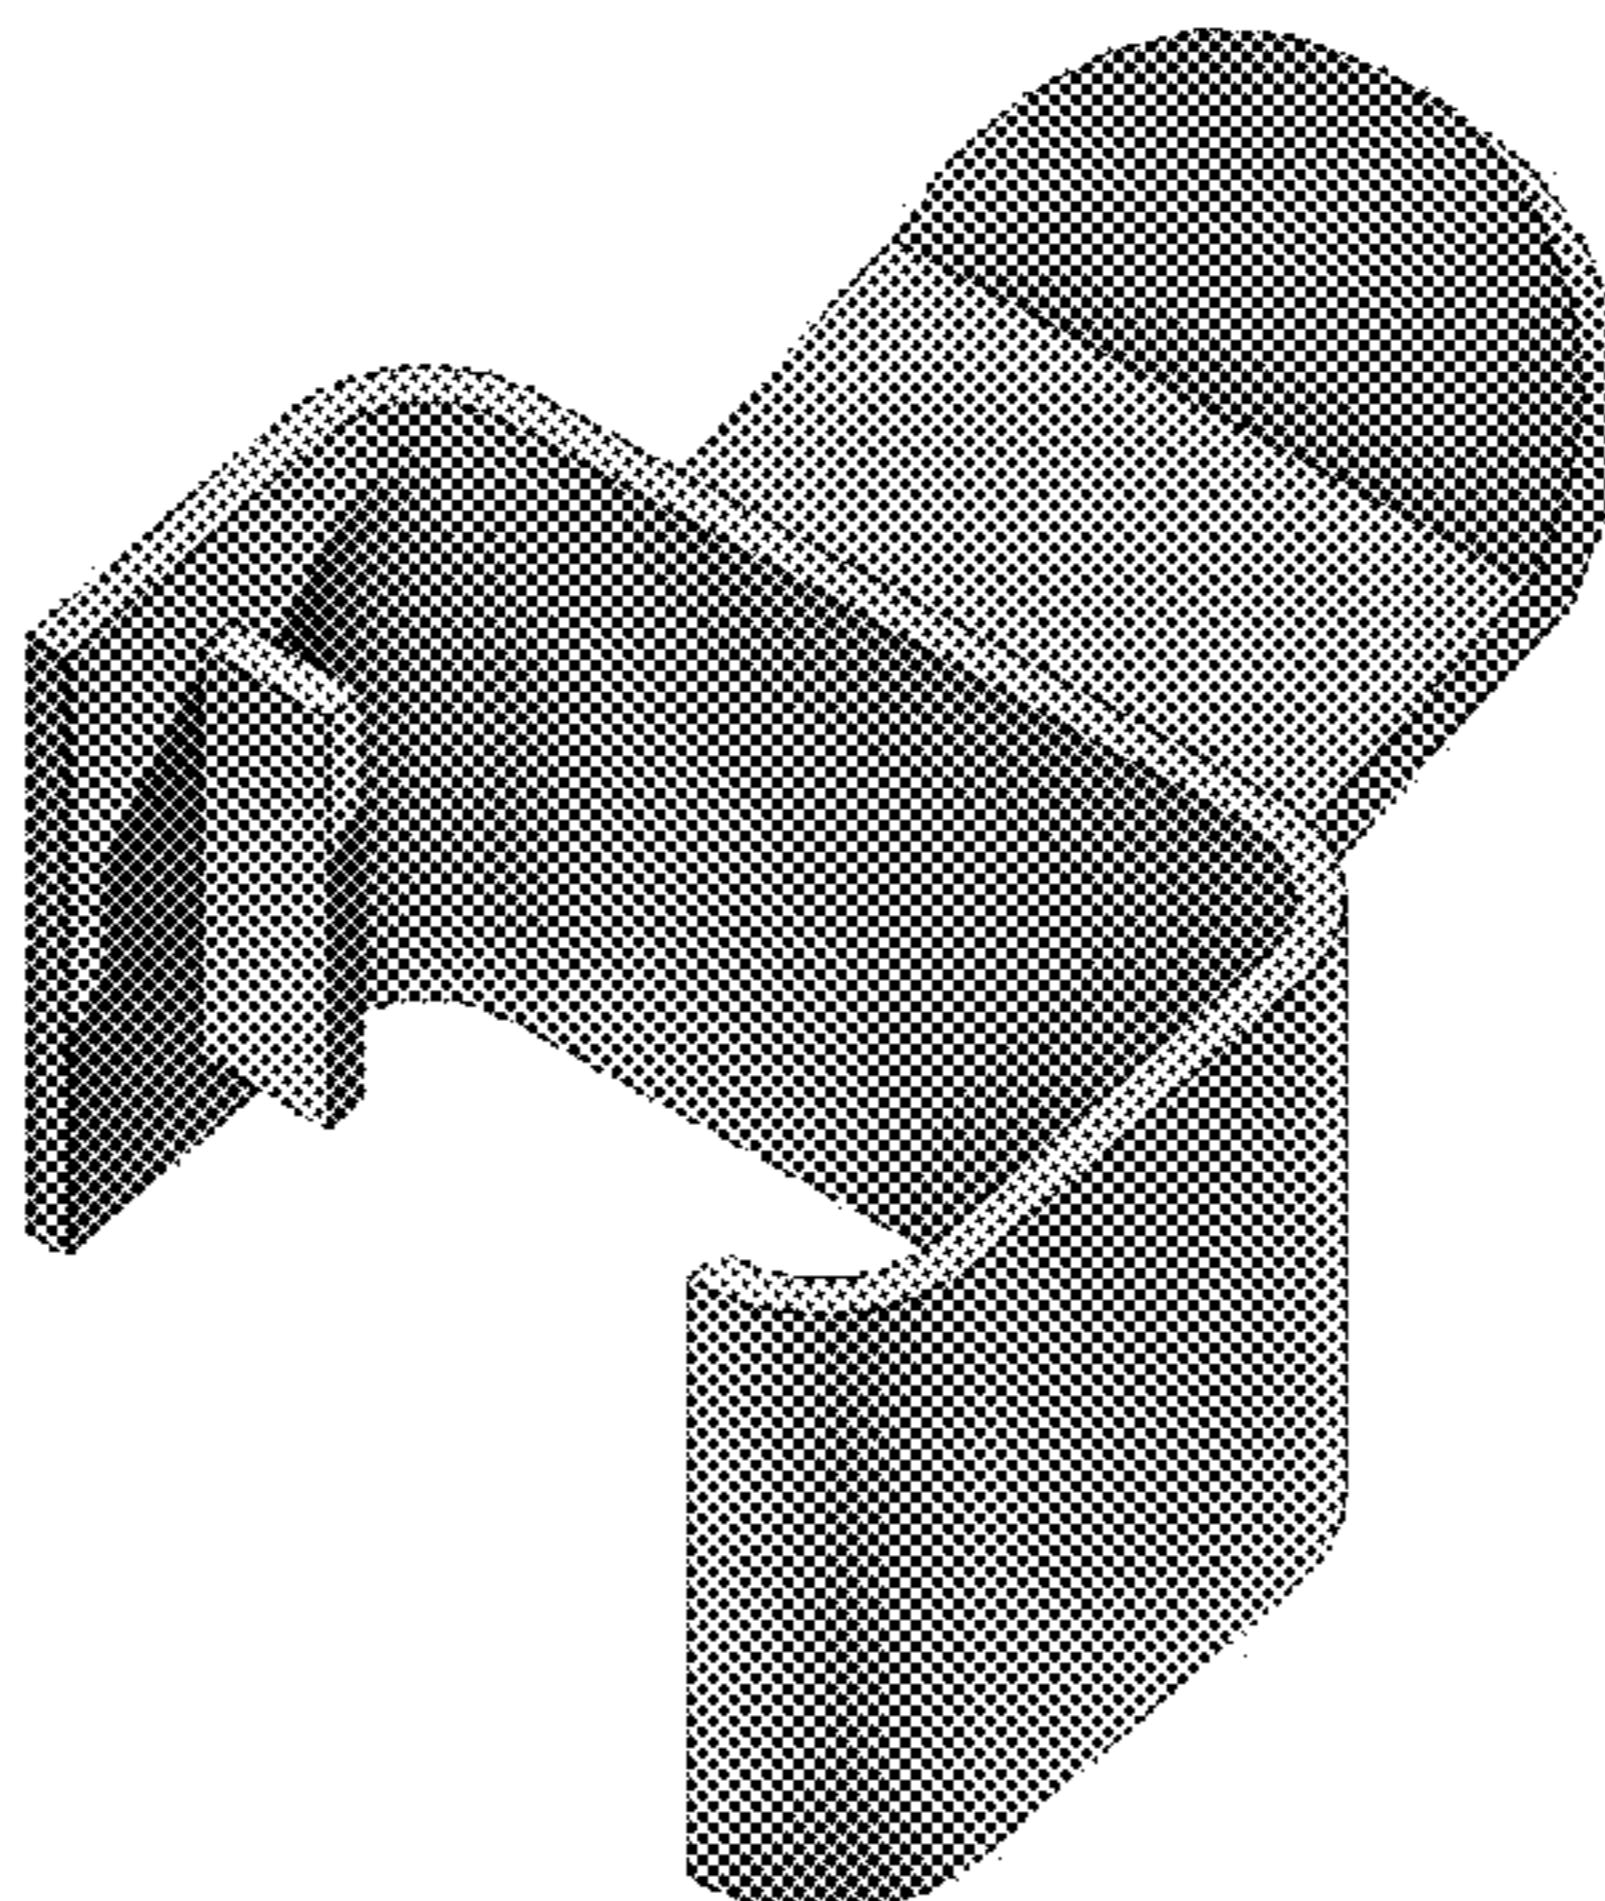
is a back, left-side, and top view of a sixth embodiment of the design.
